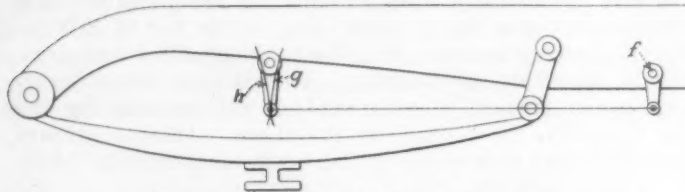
LATER TYPE OF BRAKE LINKAGE
